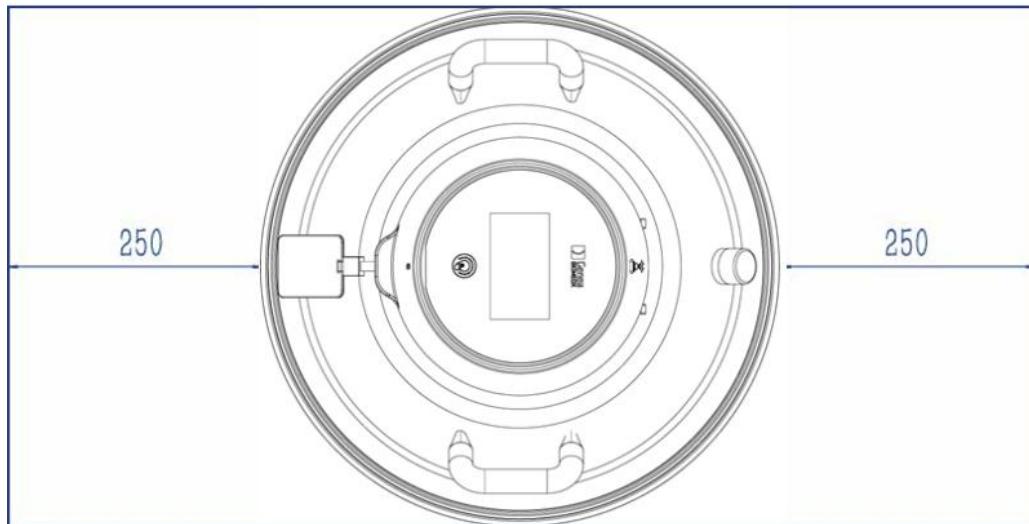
Minimum recommended spacing in front and behind tank (units in mm)
